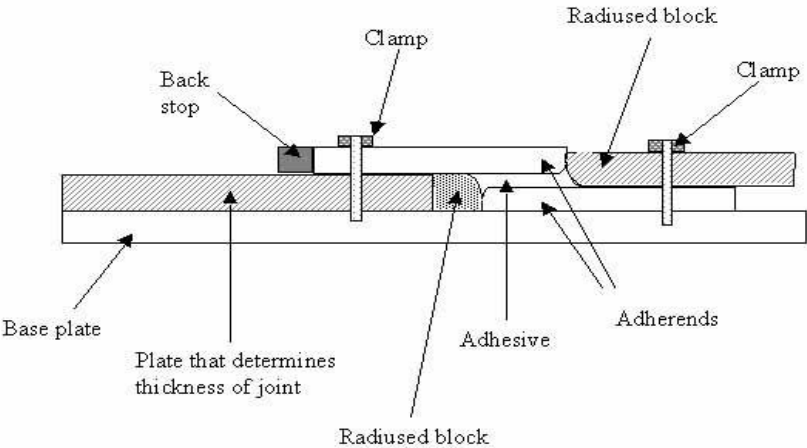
Fixture for controlling single-lap joint adhesive fillet
